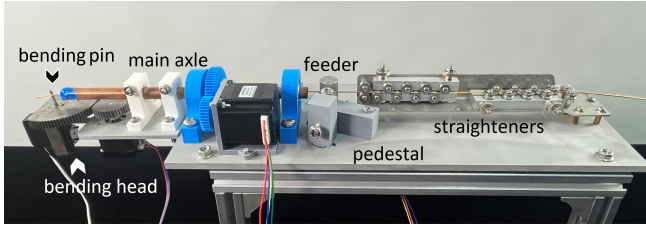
Our DIY wire-bending machine, based on [Dejan 2018], consists of straighteners, a wire feeder, a bending head with bending pin, and pedestal. The rotation center of the bending pin is aligned with the wire outlet. The DuPont wires in the picture connect the motors and drivers.
